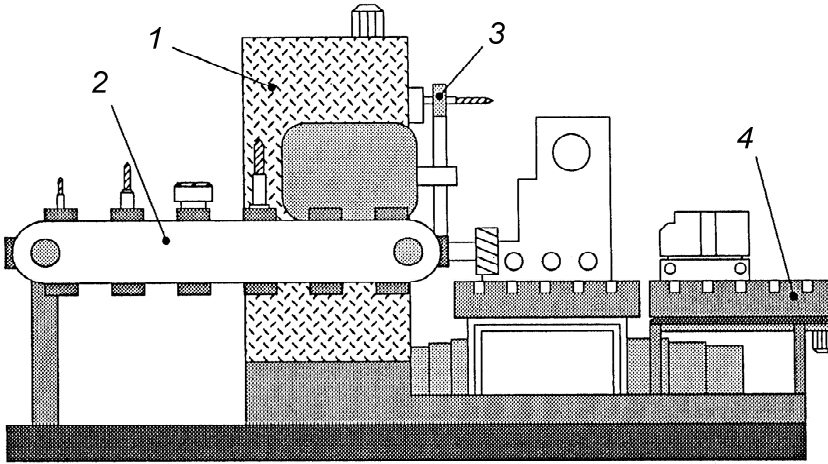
Functional structure of a machining center: 1 – machine tool, 2 – tool matrix, 3 – tool changer, 4 – pallet shuttle
